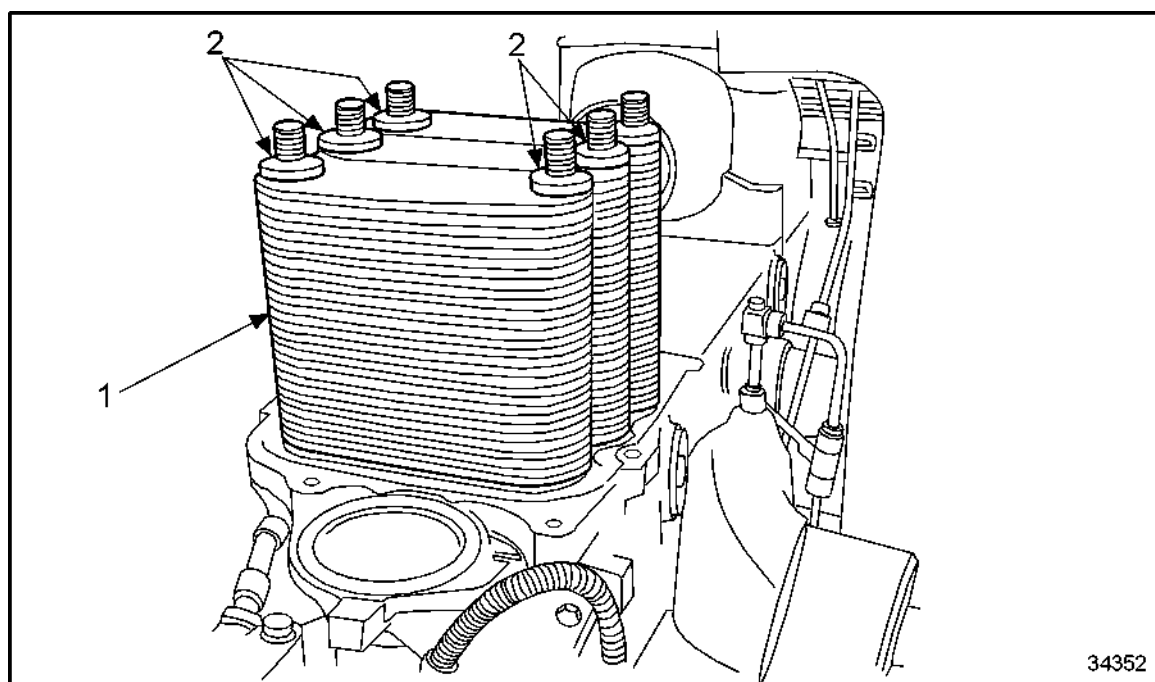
Removing Oil Cooler Housing from Coolant Distribution Housing
